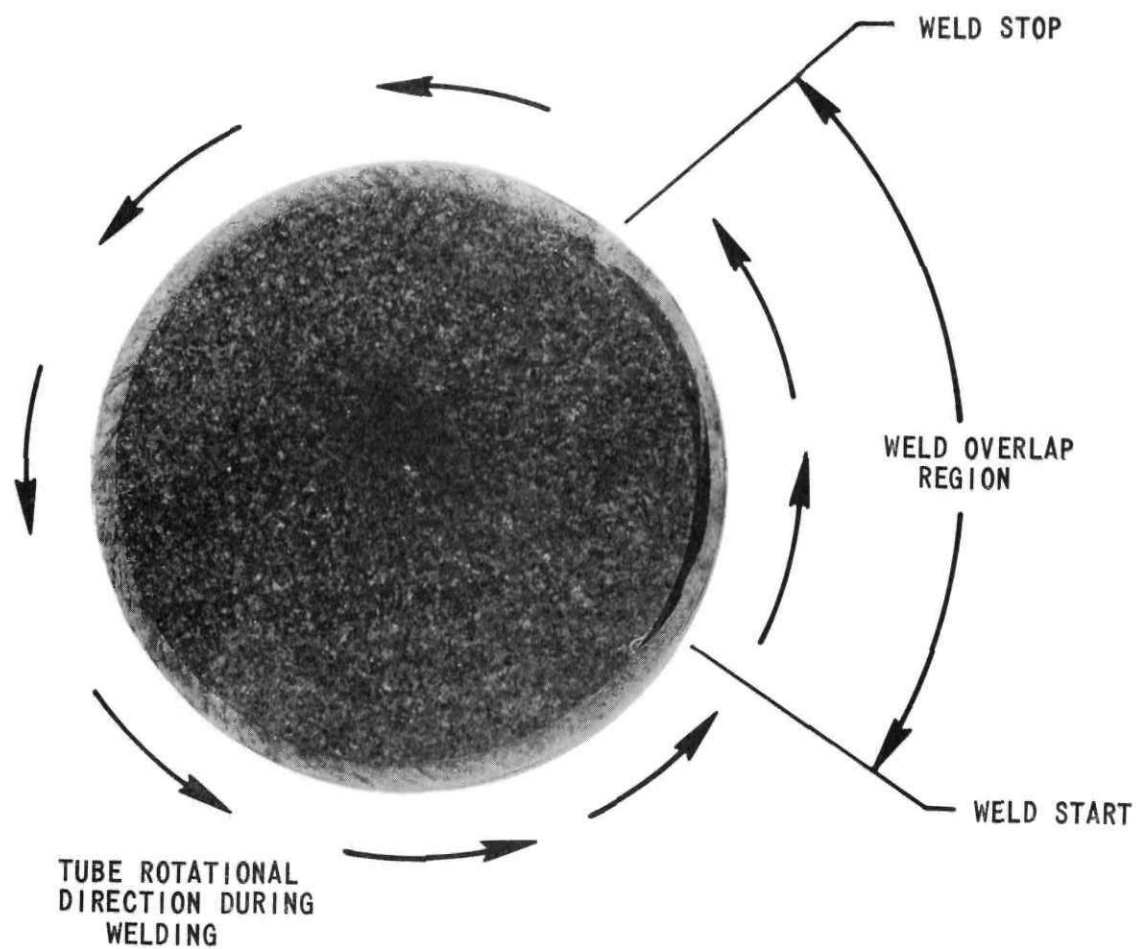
Tube to End Plug Closure Weld Showing the Circumferential Location of an Internal Solidification Void in the Weld Overlap Region. Mag 10X
